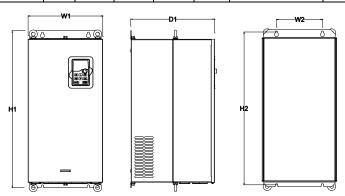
Wall installation of 380 V 37-110 kW VFDs
